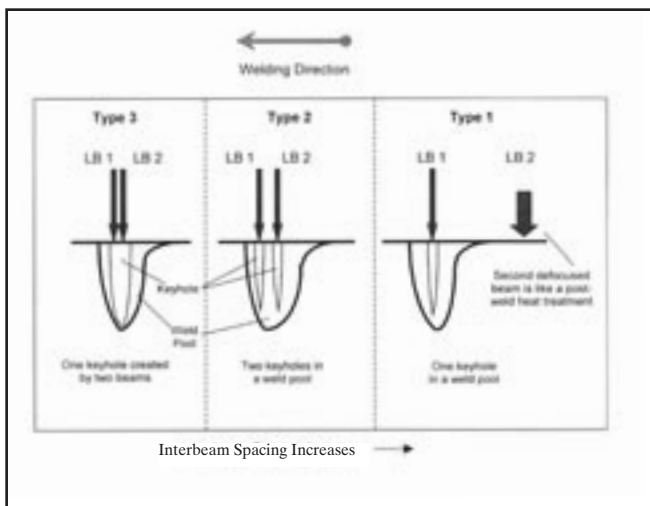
Welding mechanism at various interbeam spaces in parallel dual-beam laser welding.
